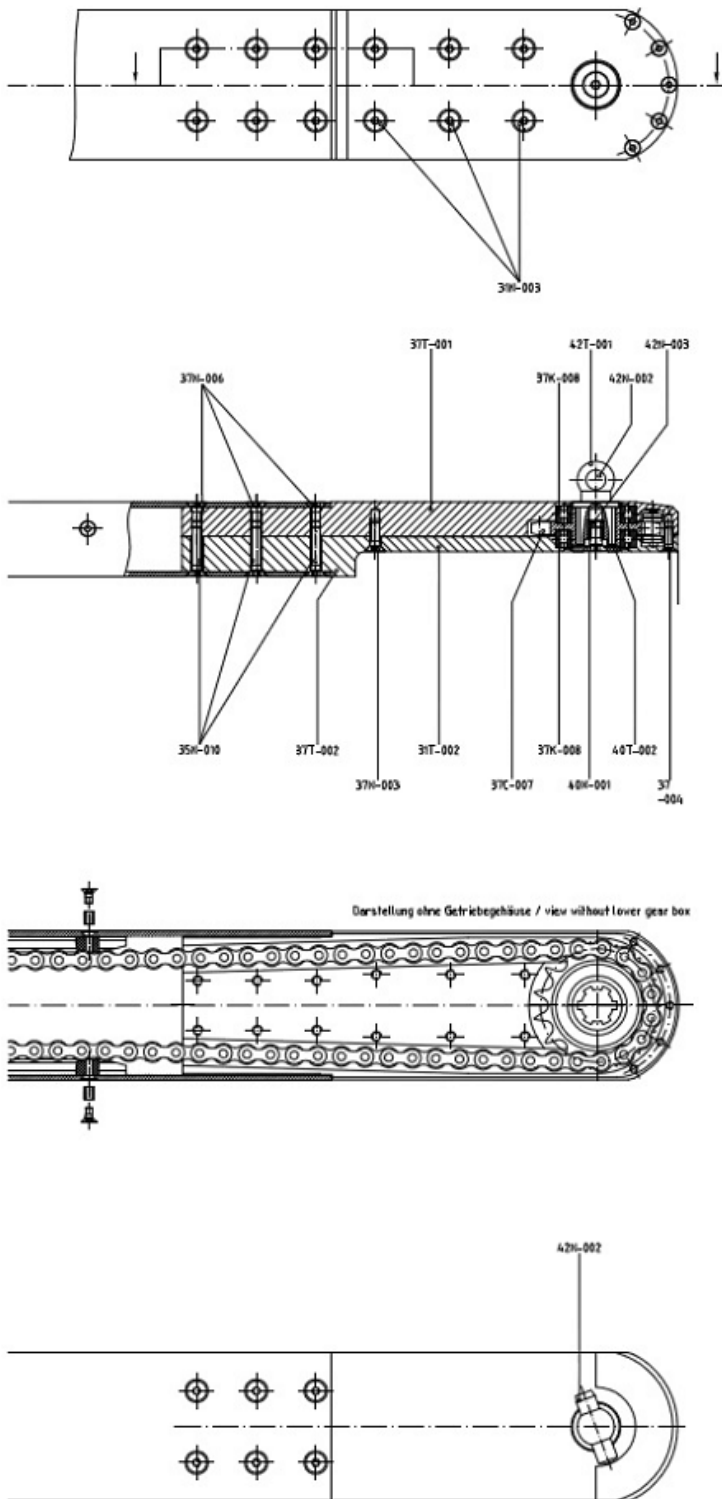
440-10S-N01-00 BASIC MACHINE
